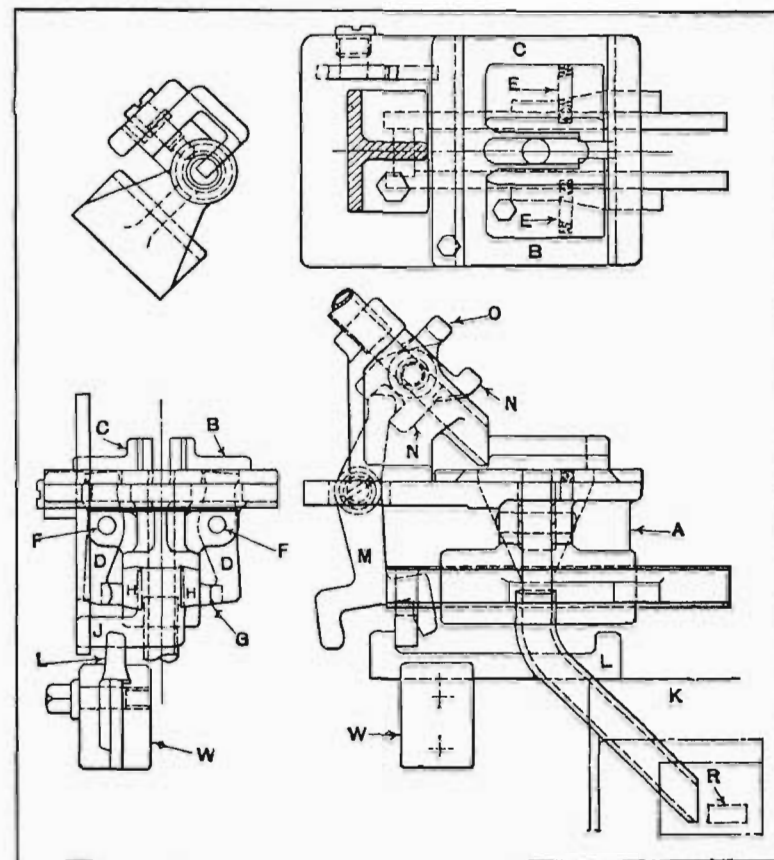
Device for Feeding Taper Rolls Into Centerless Grinding Machine
